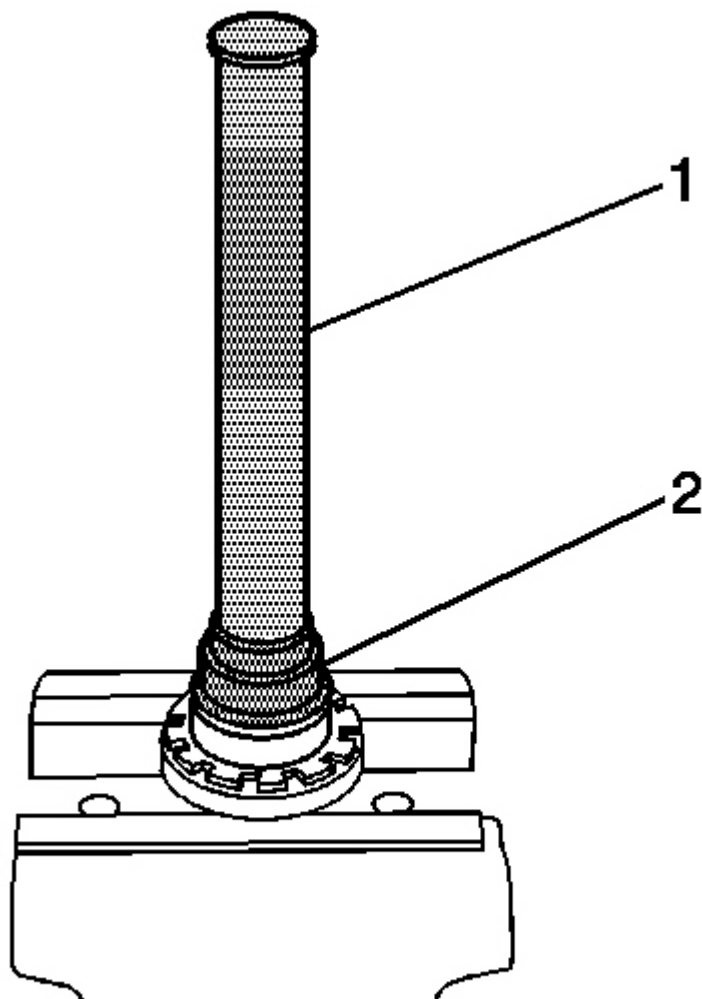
Universal Driver Handle - 3/4 In - 10 And Differential Bearing Adjuster Needle Bearing Replacer - RH
